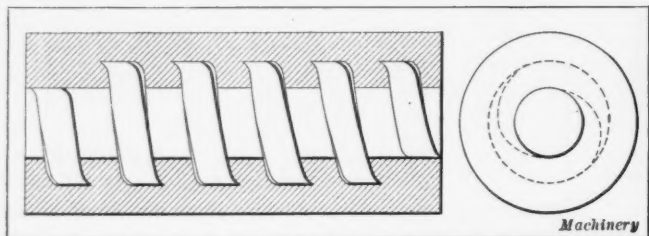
Cross-sectional View of "Nichrome" Retort used in Rotary Gas Furnaces
